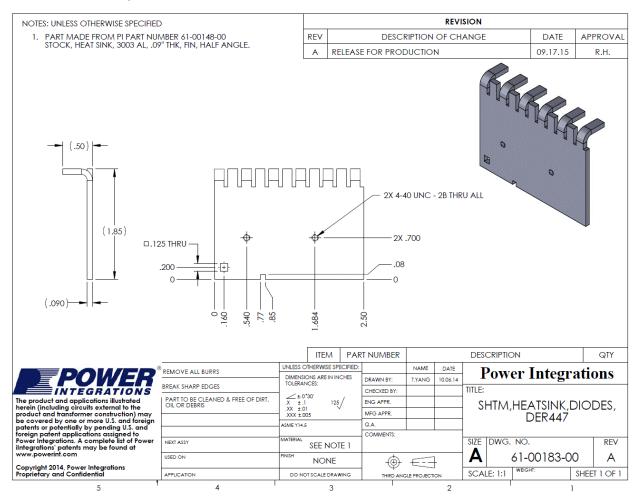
Secondary Heat Sink Sheet Metal Drawing.
